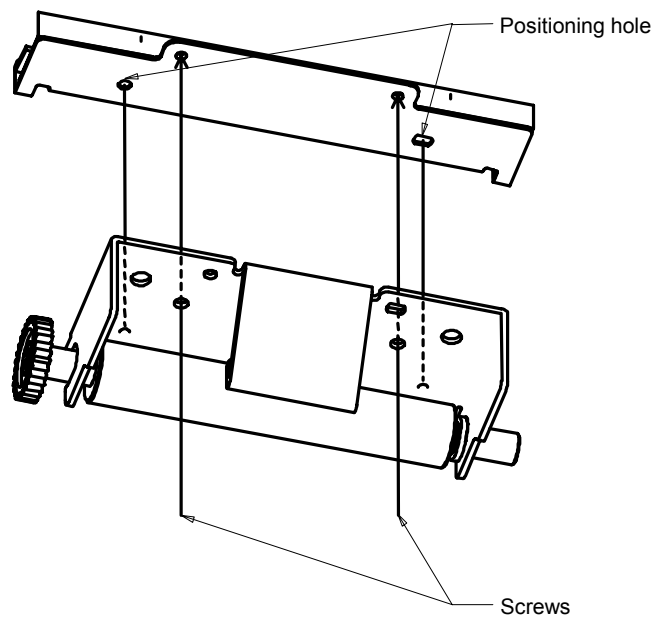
Installing Autocutter Unit (Fixing blade unit)
